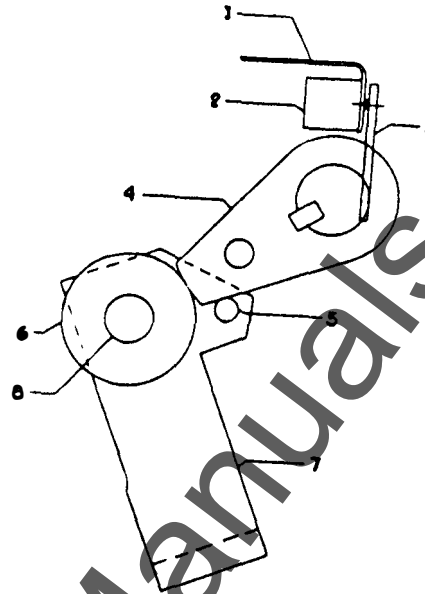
(0114C5320) LATCH CHECKING SWITCH
